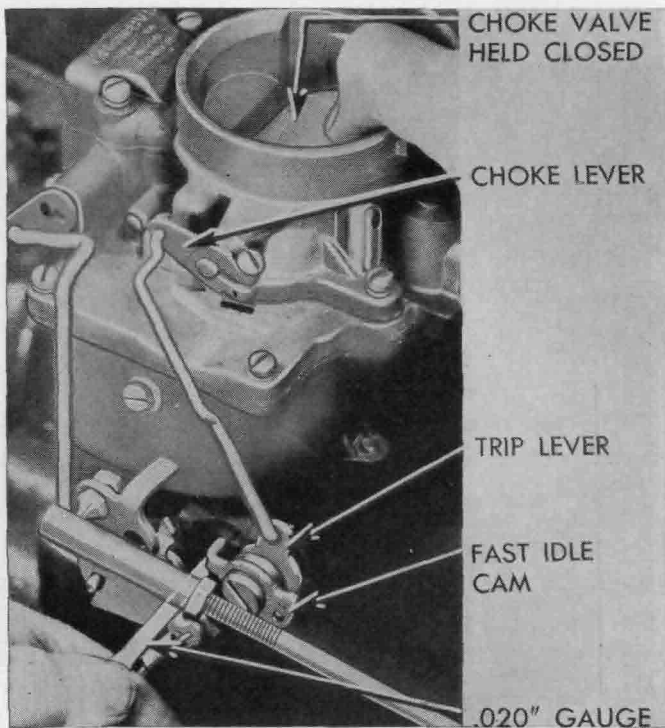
Checking fast-idle-cam clearance. (Buick Motor Division of General Motors Corporation)
